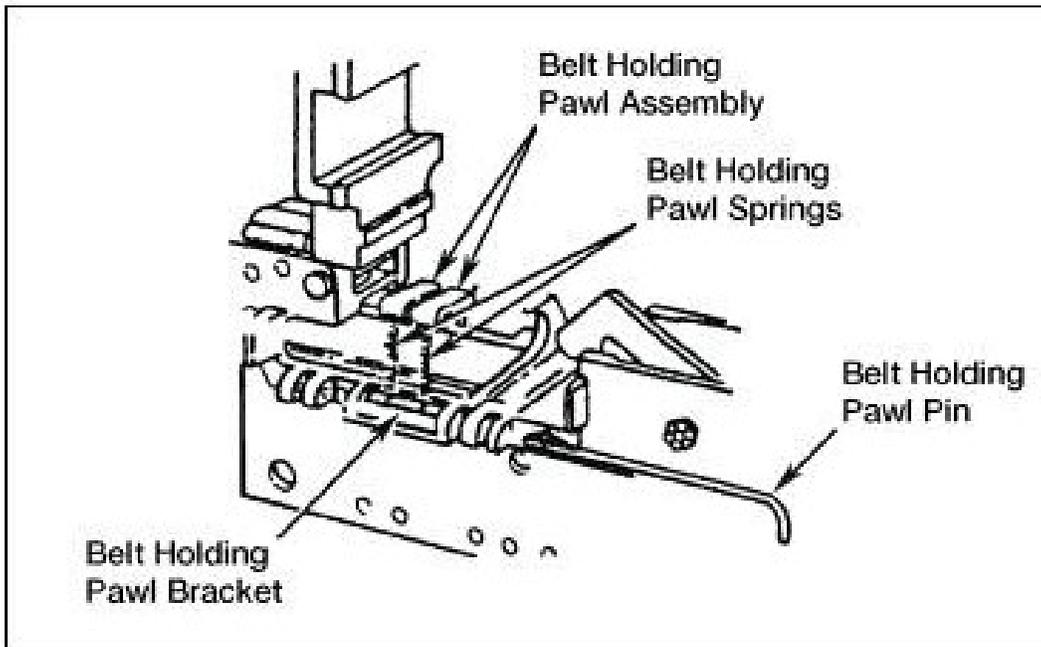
ST-1025_25 (Installation of the belt holding pawl assembly)
